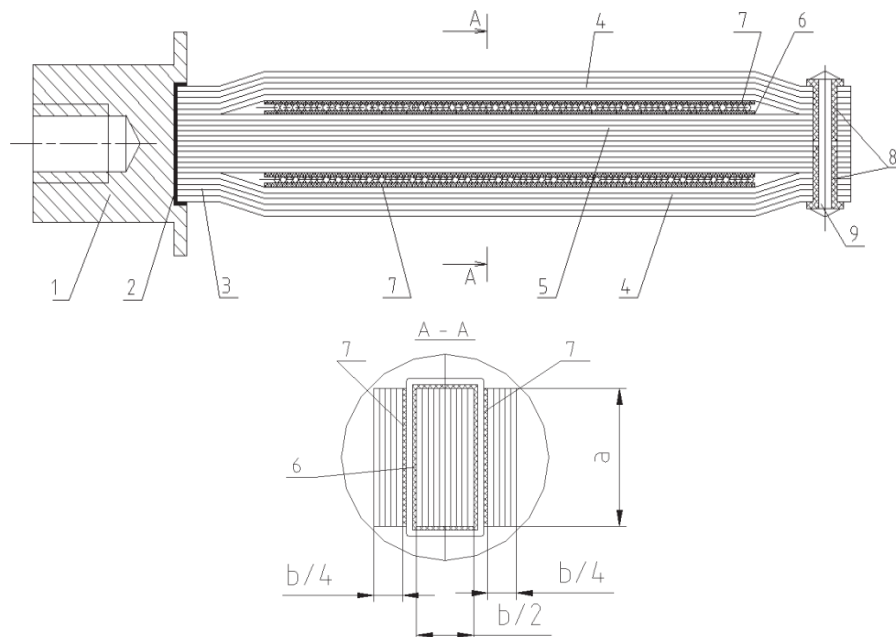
Assembled three-rod magnetostrictive ultrasonic transducer.
